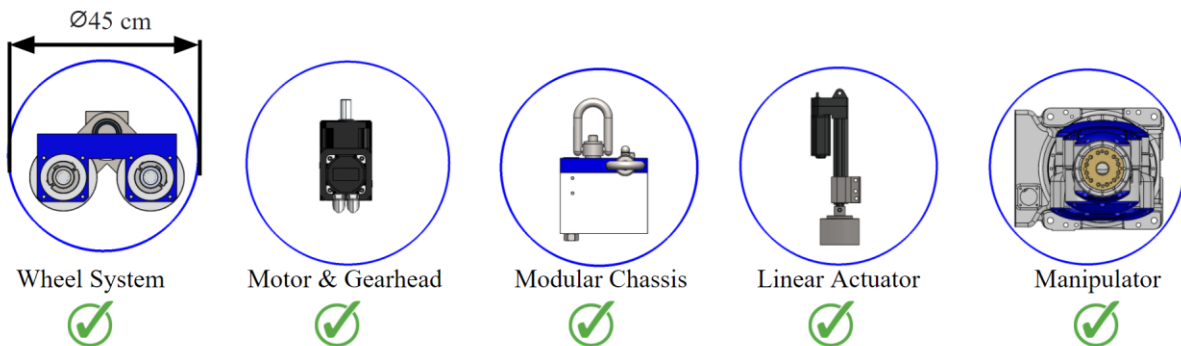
OmiBot Subassembly View (parts and circles shown to scale, blue circle represents 45 cm vessel opening)
